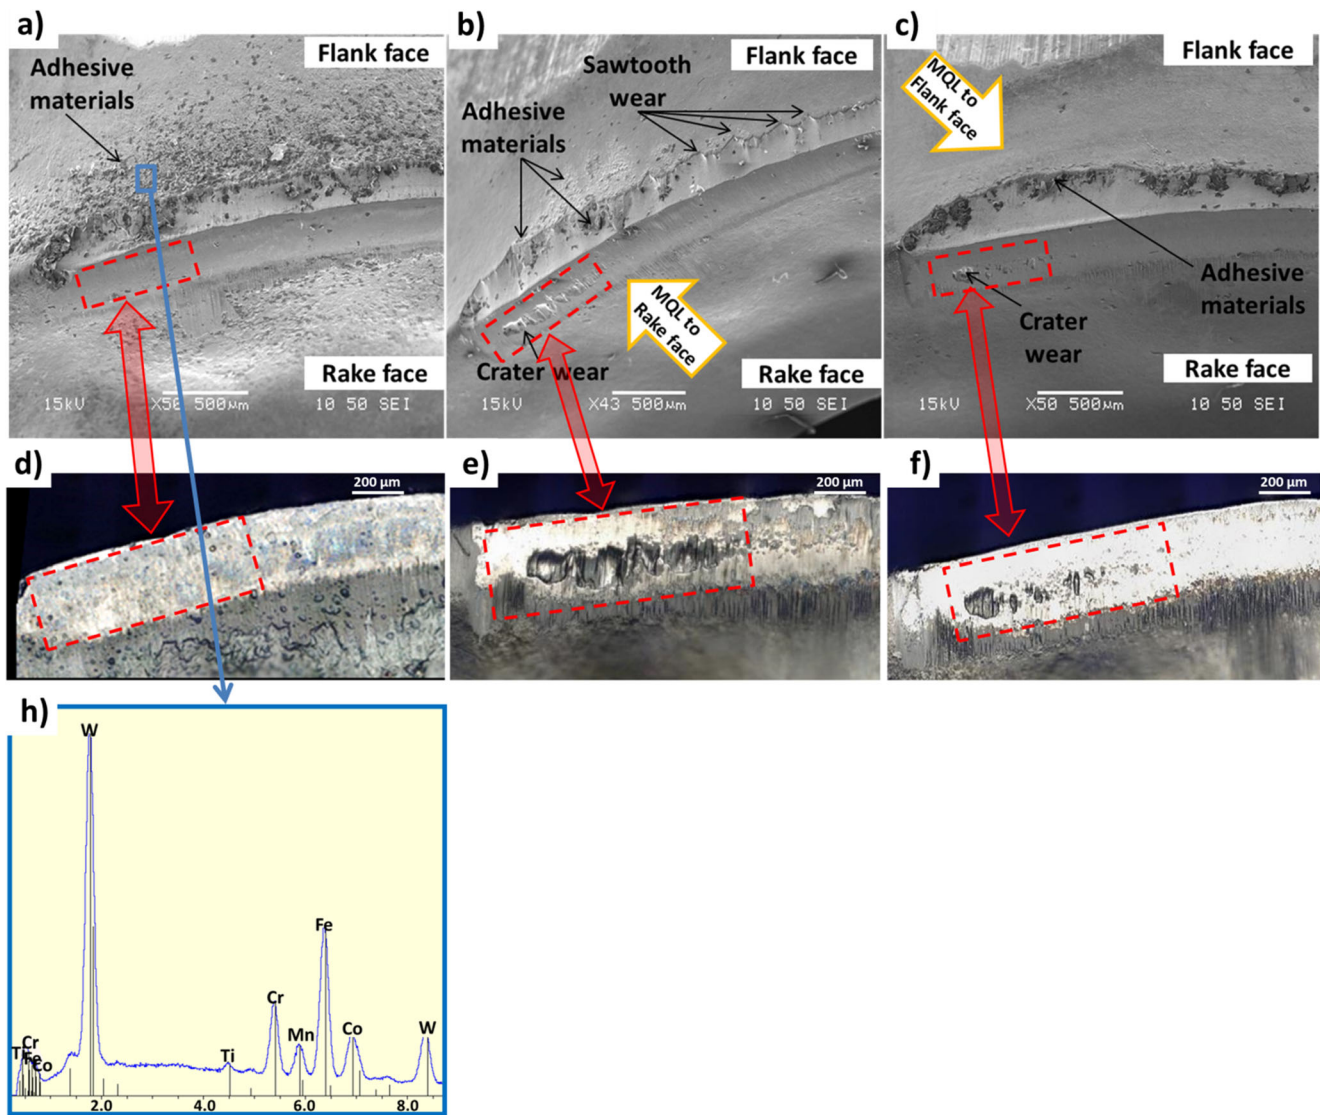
Insert wear analysis at $a_{p \max}$ zone after a dry machining (under SEM), b machining with MQL RF (under SEM), c machining with MQL FF (under SEM), d dry machining (under Keyence), e machining with
